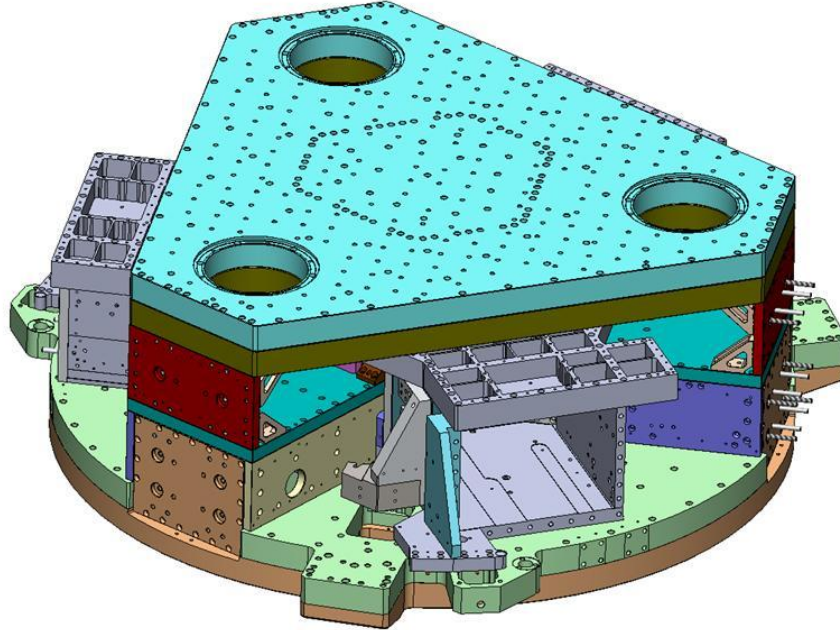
Assembly with D0901518 & D0901519 Keel Plates on
